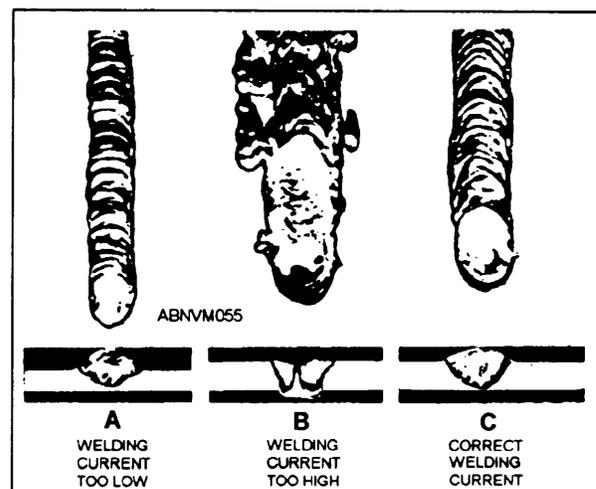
Weld bead characteristics determined by welding current.
